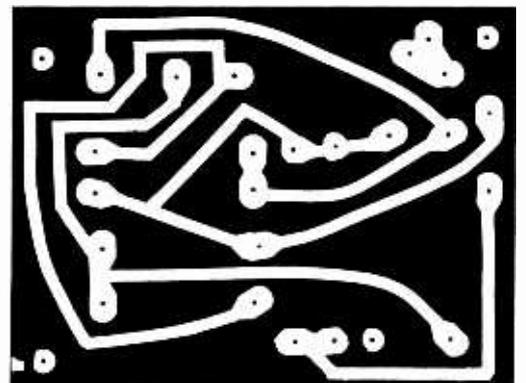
Actual-size etching and drilling guide, right; component placement above.
